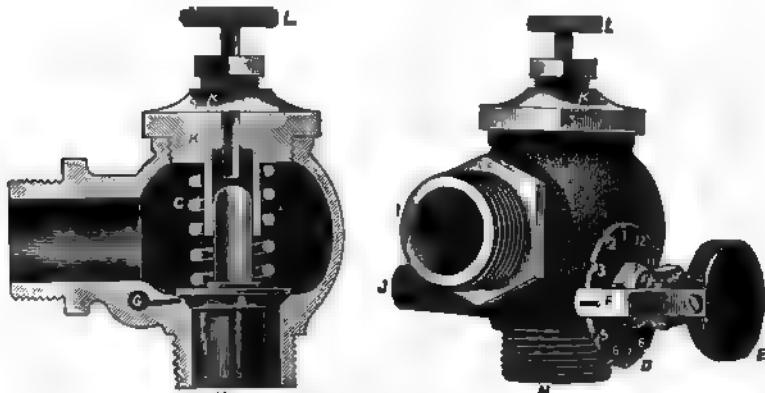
The James-Lunkenheimer Improved Mixing Valve. B, fuel inlet valve; C, spring controlling B; E, the wheel controlling gasoline valve; F, clip or top for holding E in position; G, gasoline supply tube; H, air inlet; I, entrance to cylinder; J, entrance for gasoline; K, cover of valve chamber; wheel and spindle controlling tension of spring, C.
